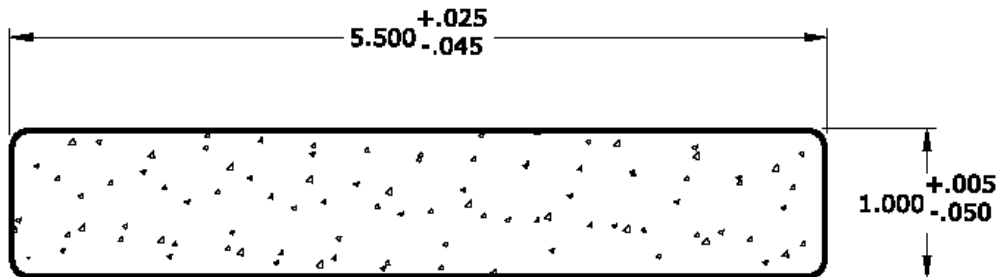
ENDECK® STRAIGHT EDGE DECK BOARD
